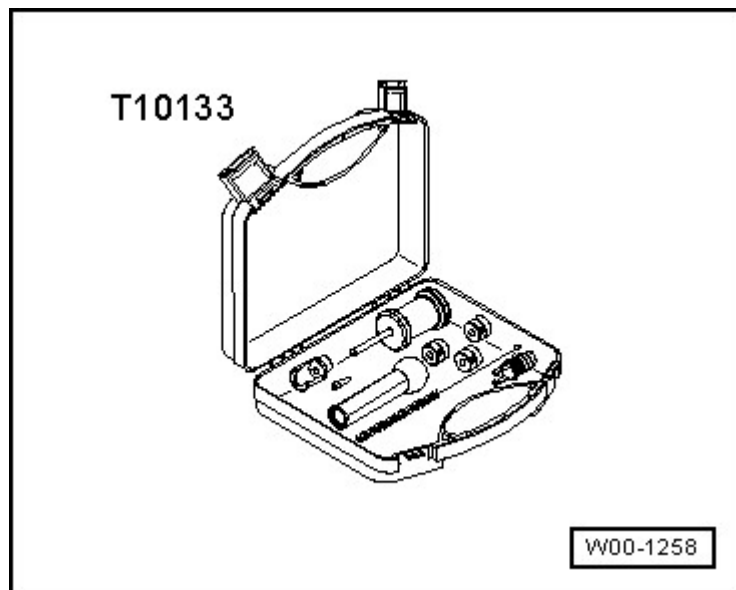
Identifying Impact Puller T10133/3 From Tool Set T10133
